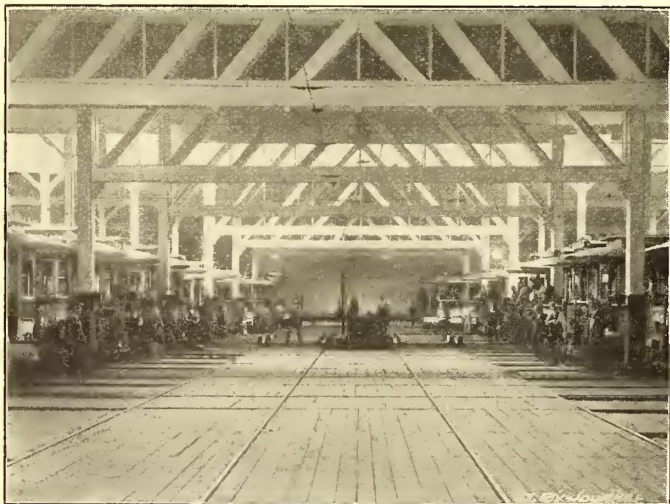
VIEW IN PAINT SHOP—WEST END STREET RAILWAY.
